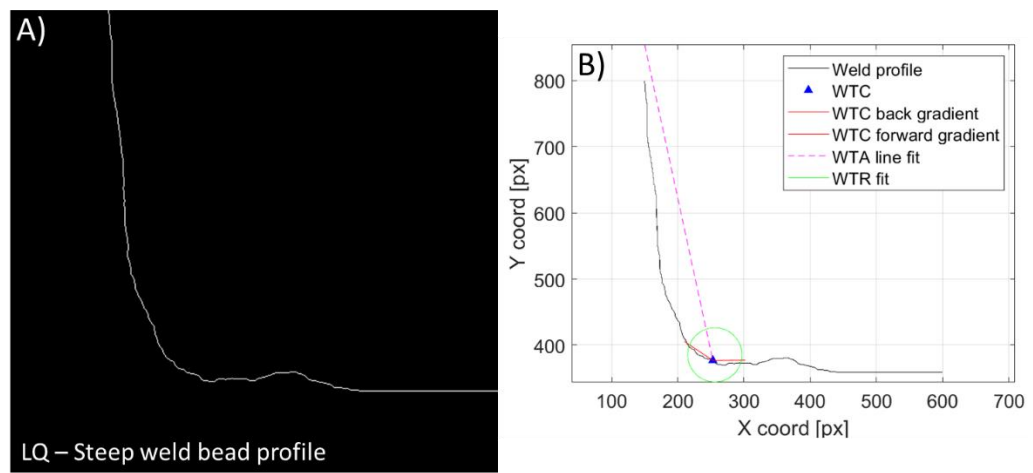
LQ steep weld bead profile - A) original single-pixel weld profile; B) weld toe geometry extraction after MATLAB processing.
